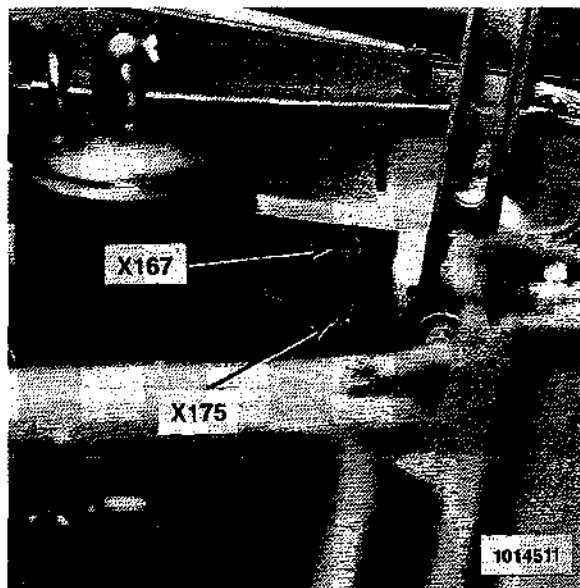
LH Front Of Engine Compartment (M30 Engine Shown; M20 And M5 Engines Similar)
